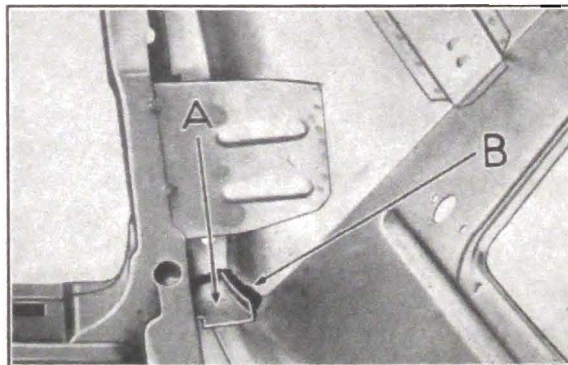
Method of dust sealing at lower end of front body pillar and floor.
